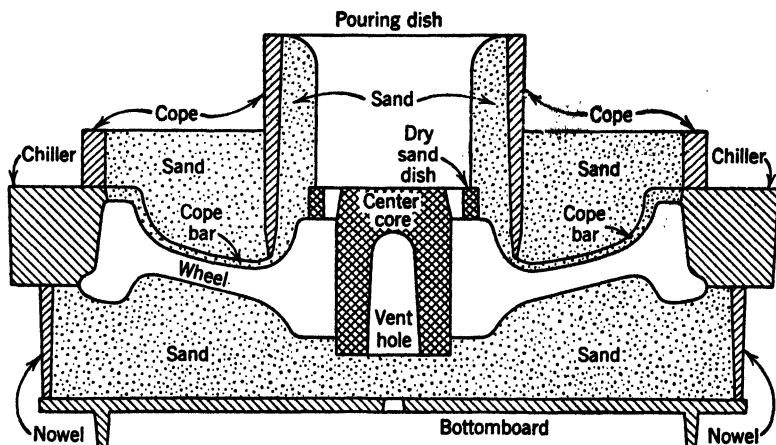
Cross Section of Wheel Mold Used in Car-Wheel Manufacture. Chiller produces white-iron rim, while flange and hub embedded in sand produce gray iron. (Courtesy F. K. Vial, Association of Manufacturers of Chilled Car Wheels.)
